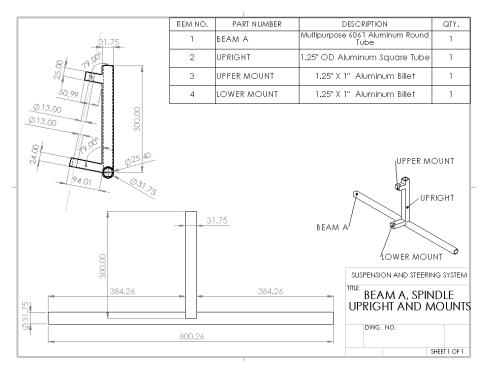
Spindle Mount Dimensions Showing Position and Alignment of Mounting Holes and Members.
